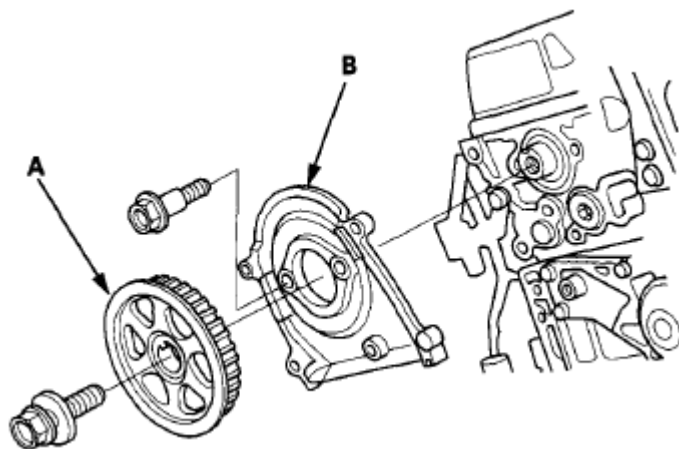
Removing Camshaft Pulleys And Back Covers - Rear
